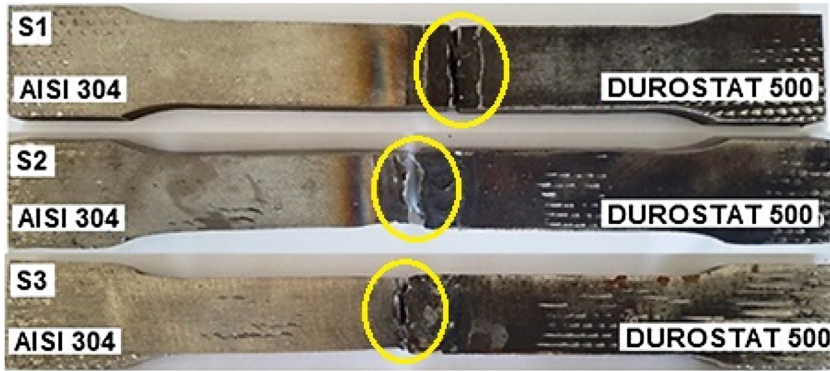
Photographs of the welded samples after the tensile test.
